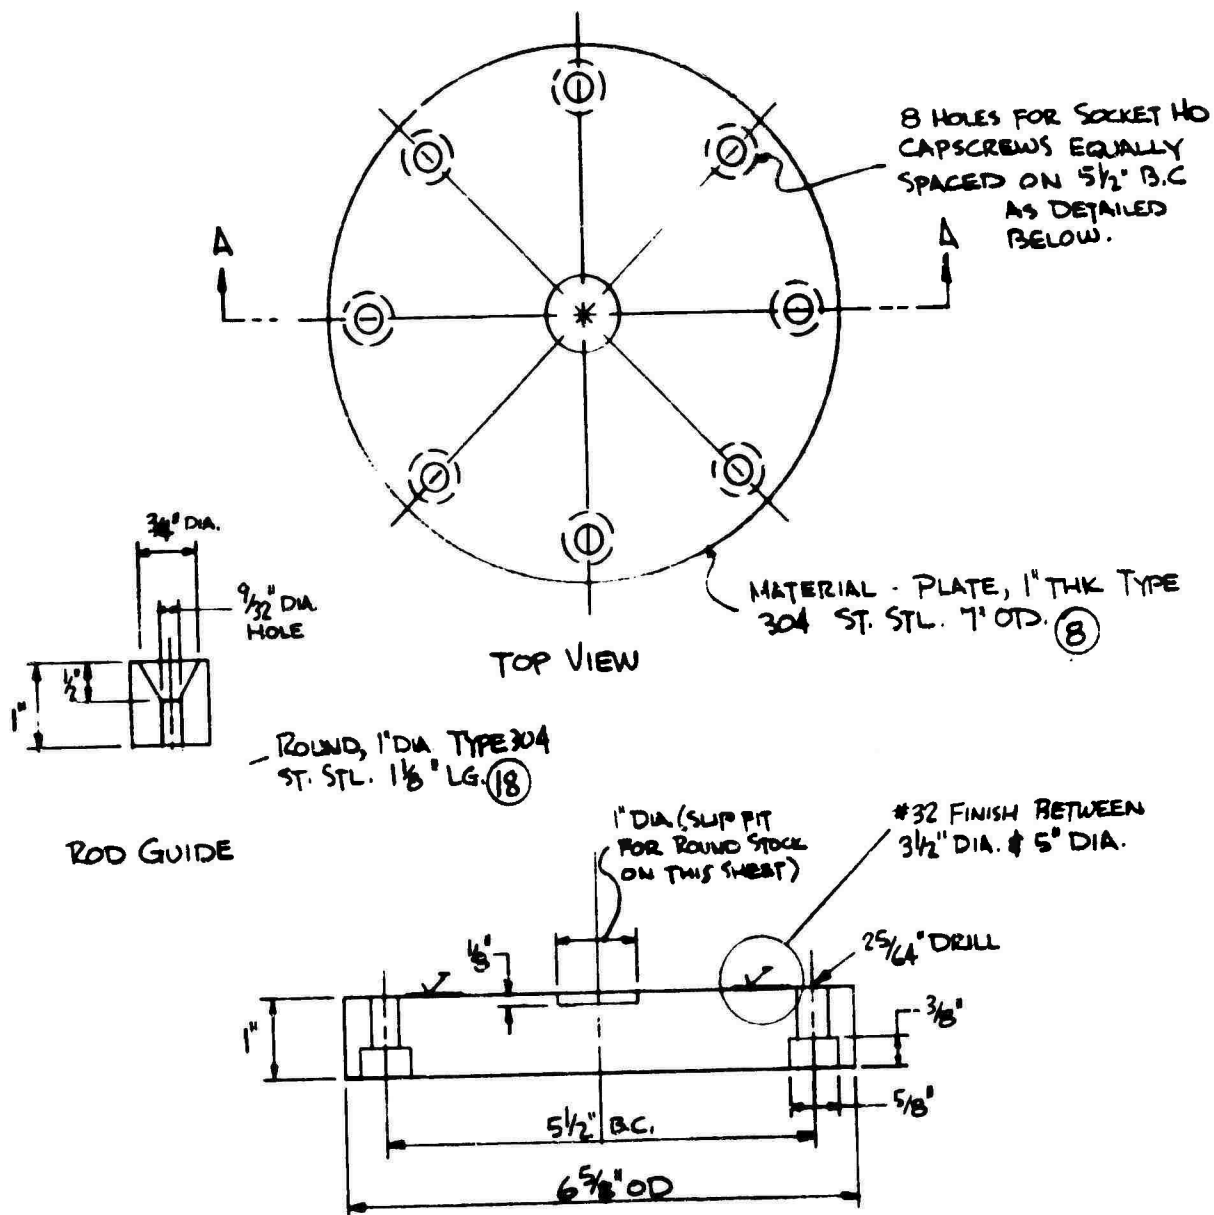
Six-inch pressure vessel. Bottom flange ring detail
